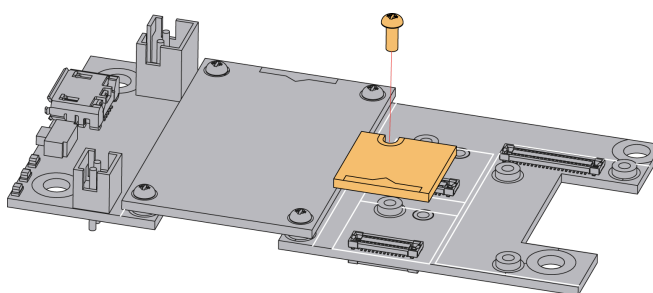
RAK1906 WisBlock Environmental Sensor Mounting
